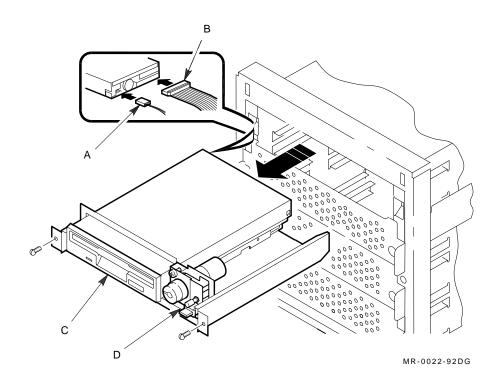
RX23 3.5-Inch Diskette Drive Removal (Part 1 of 2)
